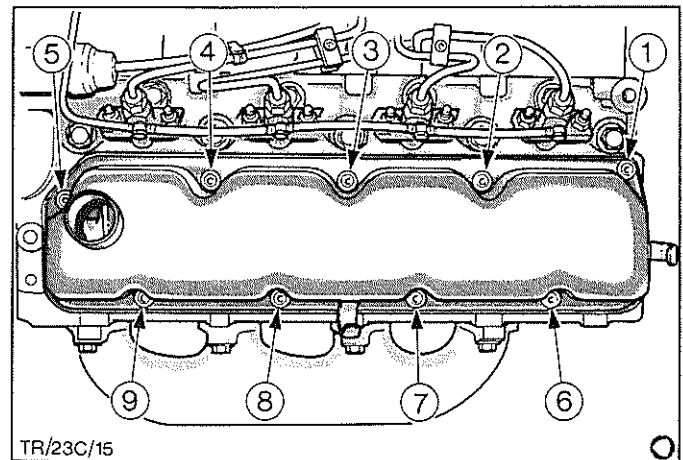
Tighten rocker cover bolts in correct sequence, then retorque immediately.
